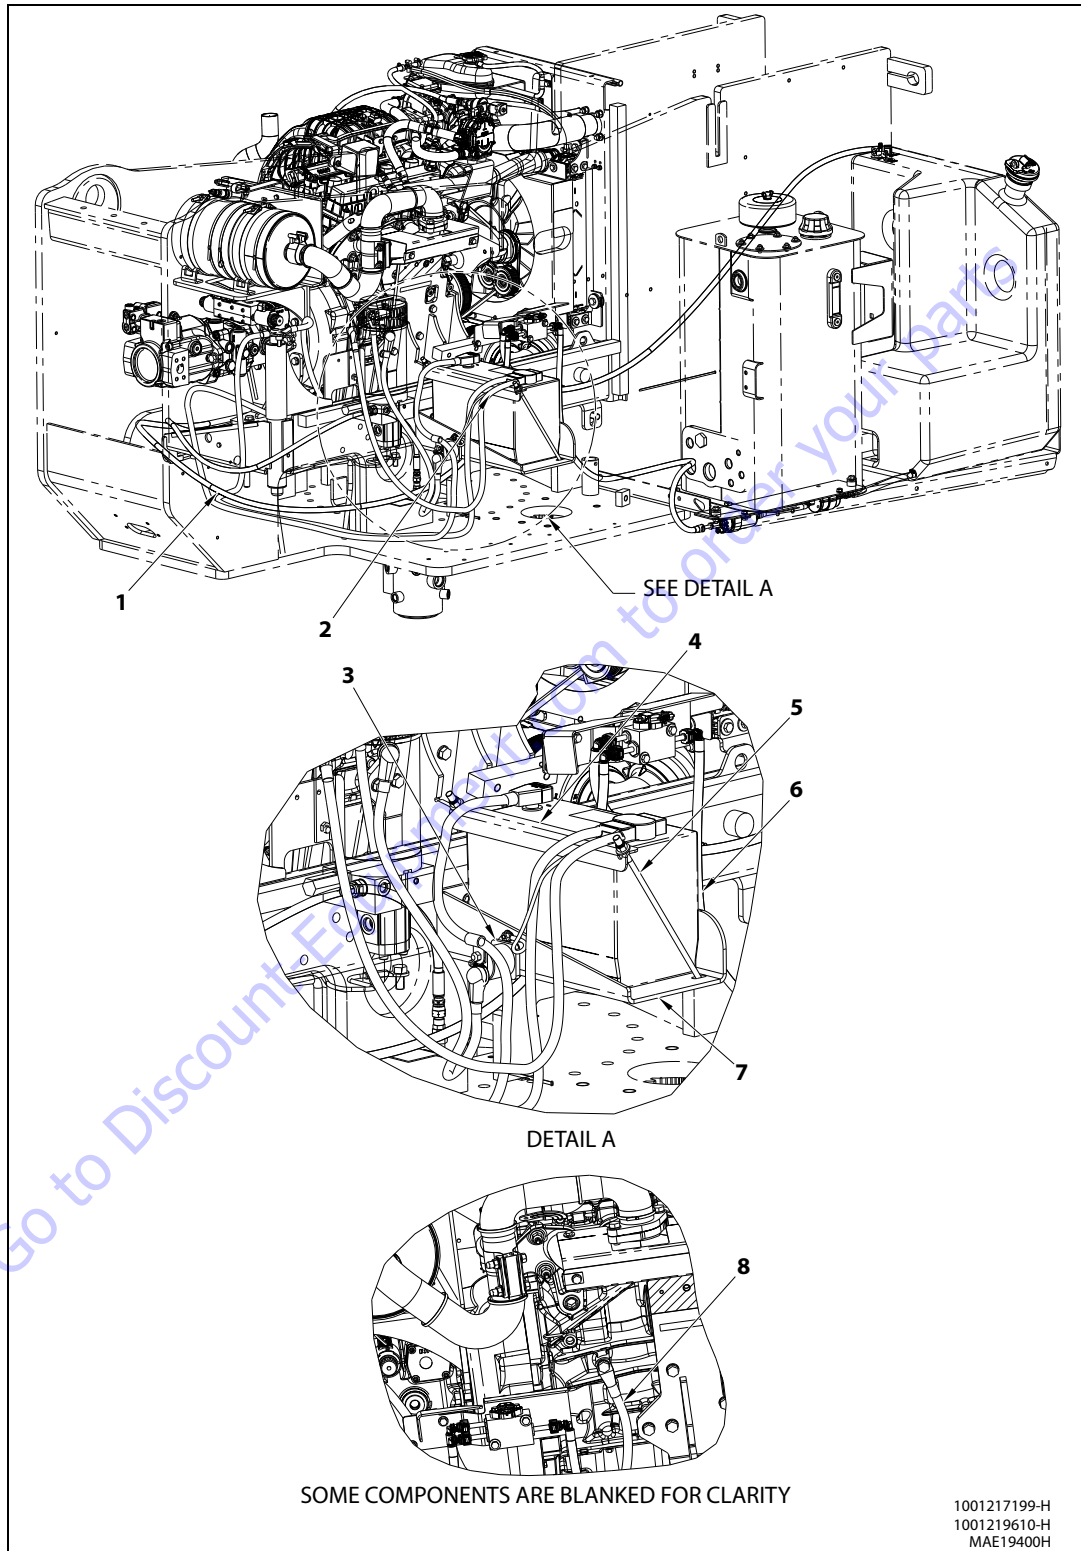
Ford Engine Installation - Sheet 2 of 5
